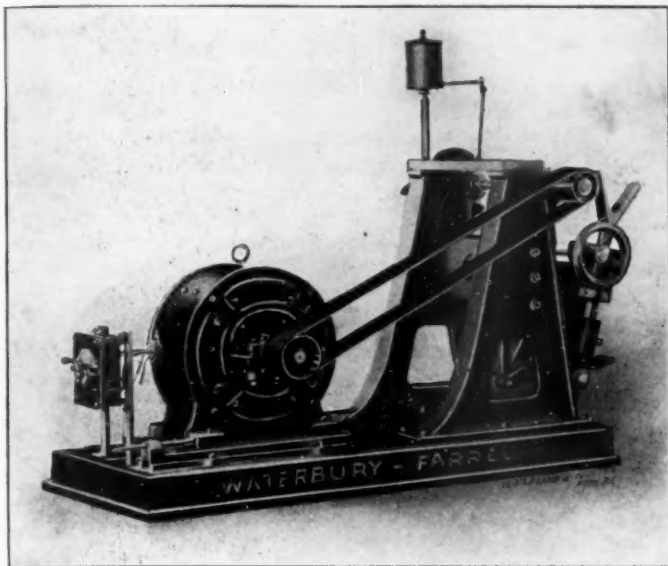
ELECTRICALLY DRIVEN METAL SAW FOR CUTTING METAL TUBES. MADE BY WATERBURY-FARREL FOUNDRY AND MACHINE COMPANY, WATERBURY, CONN.
